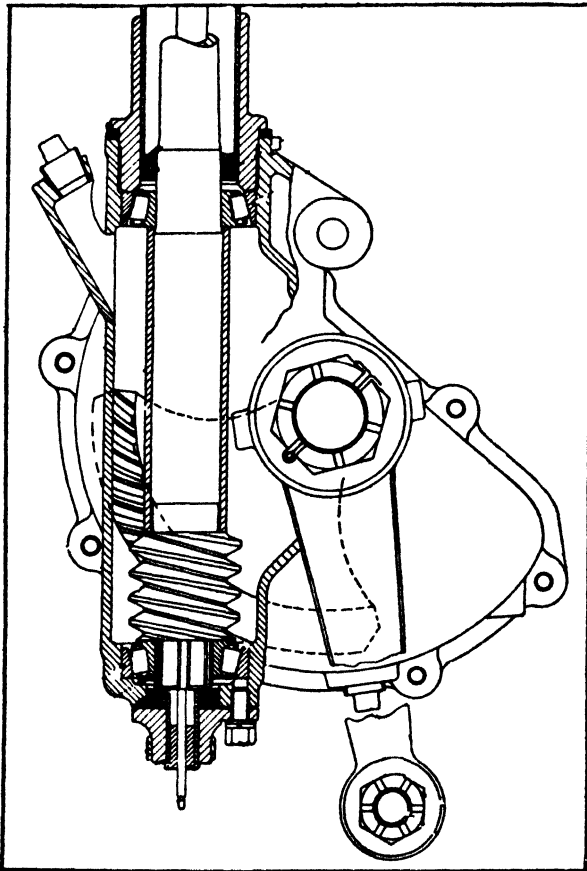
MACK WORM AND SECTOR STEERING GEAR.
